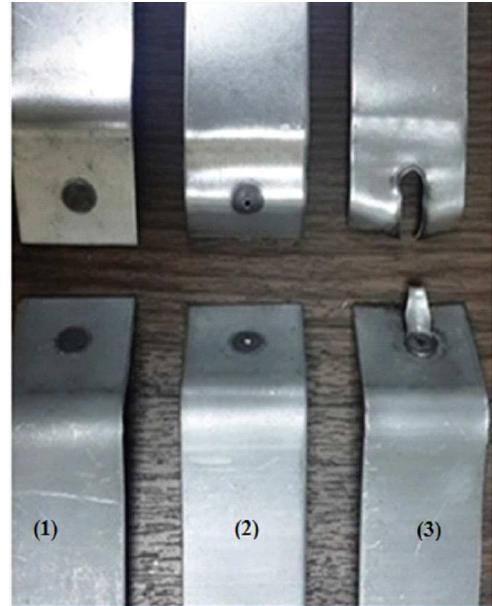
Fracture surface of tensile-peel specimens.
